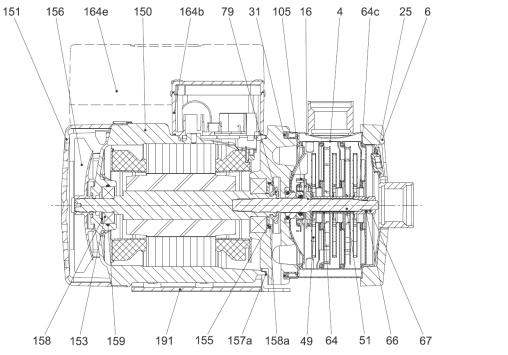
CM(E) 1-3 with ML(E) 71 motor
